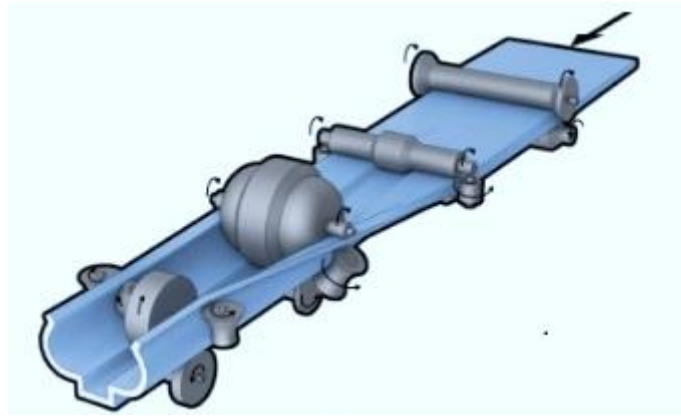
Roll forming process principle (source: <https://www.manufacturingguide.com/en/roll-forming>)
